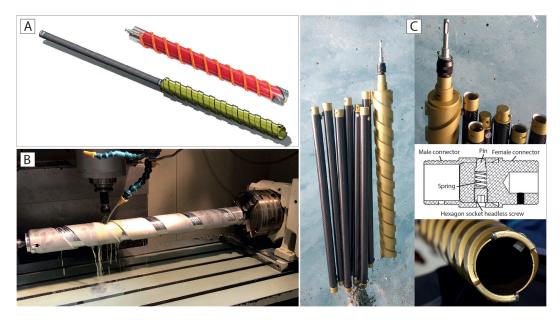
Development and construction of a lightweight decametric ice corer. (A) A 750 mm long core tube with a drilling head (view: Solidworks) under the Kovacs Mark II coring system (9 cm diameter ice core up to 1 m long). (B) Machining of the aluminium tube. (C) The anodised corer with an SDS drill bit mounting system for using a drill and its carbon extensions with male and female quick connectors. Note the tungsten carbide pellets on the drill head and the core locking mechanism.
